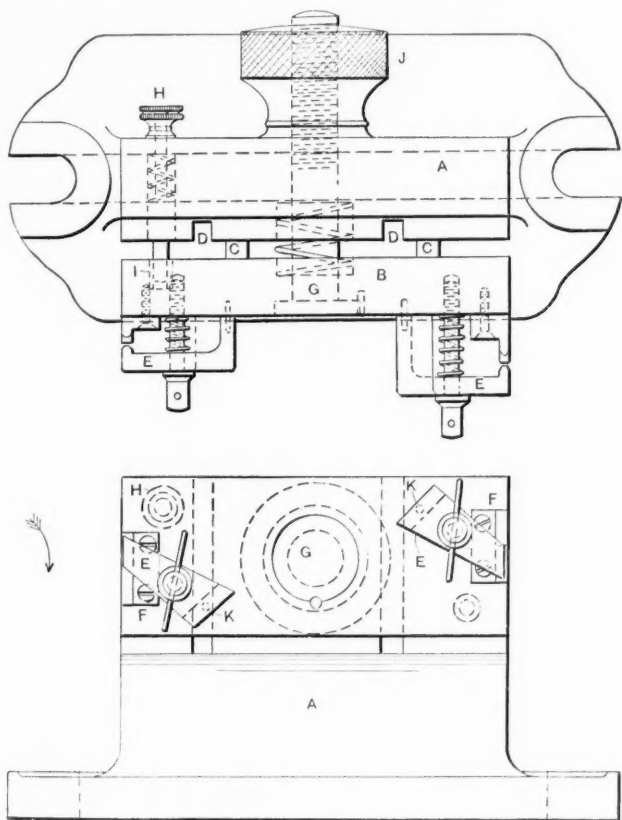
Fixture for Holding the Rod while the Bosses are being milled.
